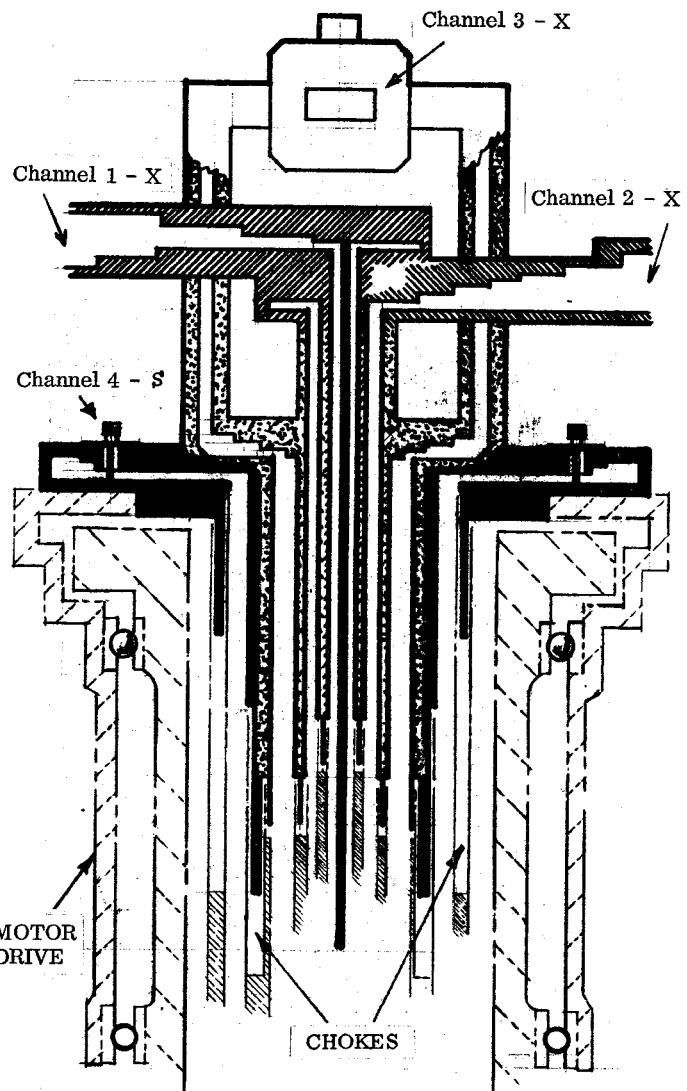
DESIGN DETAILS OF ROTARY JOINT
